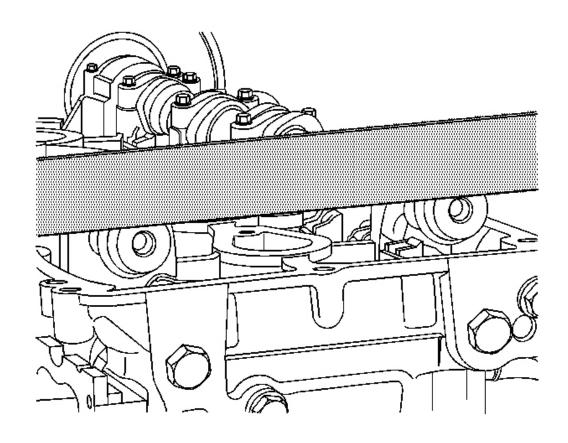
Verifying Camshaft Placement With Straightedge Courtesy of GENERAL MOTORS CORP.
